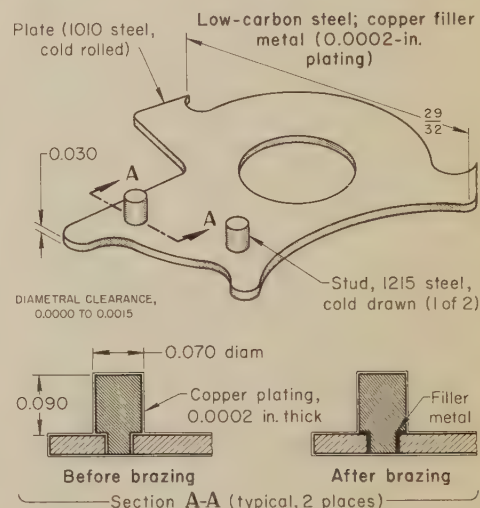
Plate-and-stud assembly with small brazed joints to which filler metal was applied by plating (Example 550)
